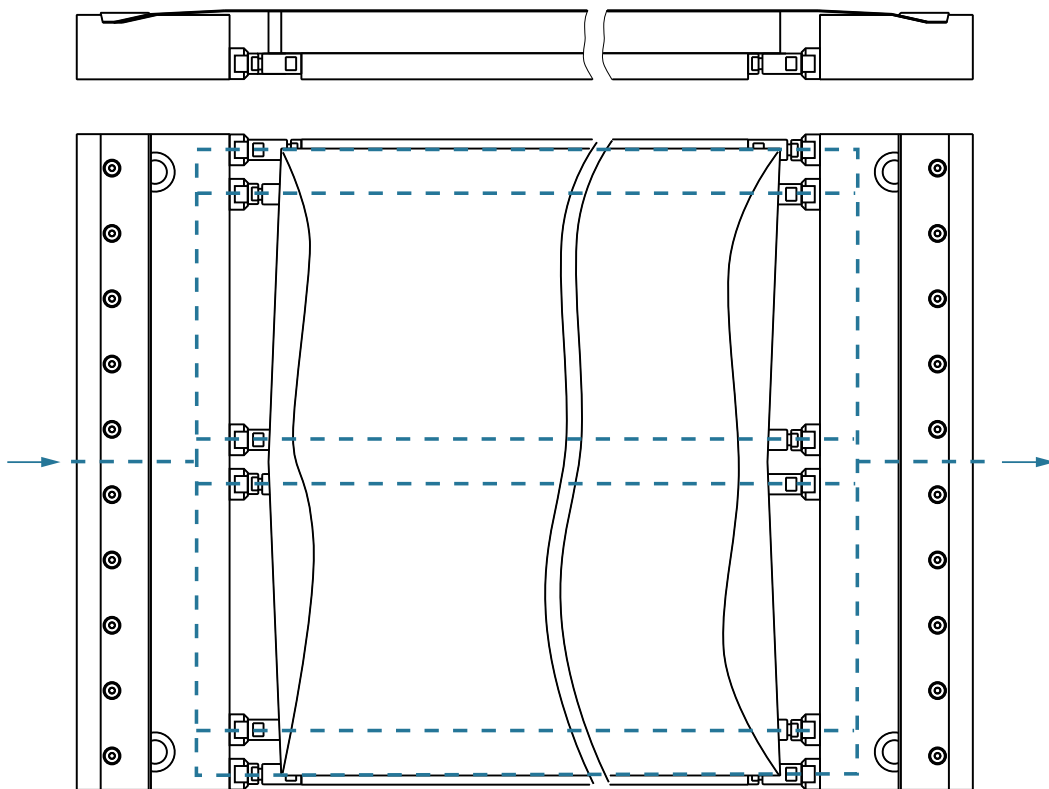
Secondary section cooling for motors of sizes 1FN3600 and 1FN3900 with combi distributors (side and top view)
